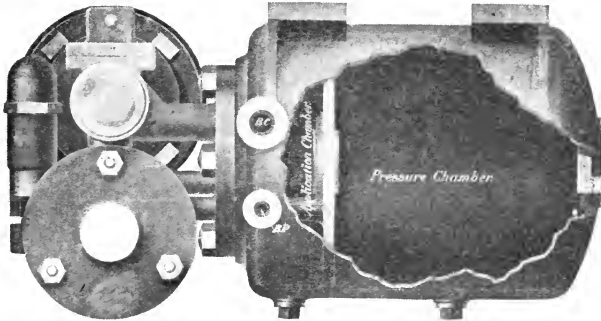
Part Sectional View of Distributing Valve and Double-Chamber Reservoir of "ET" Equipment.
